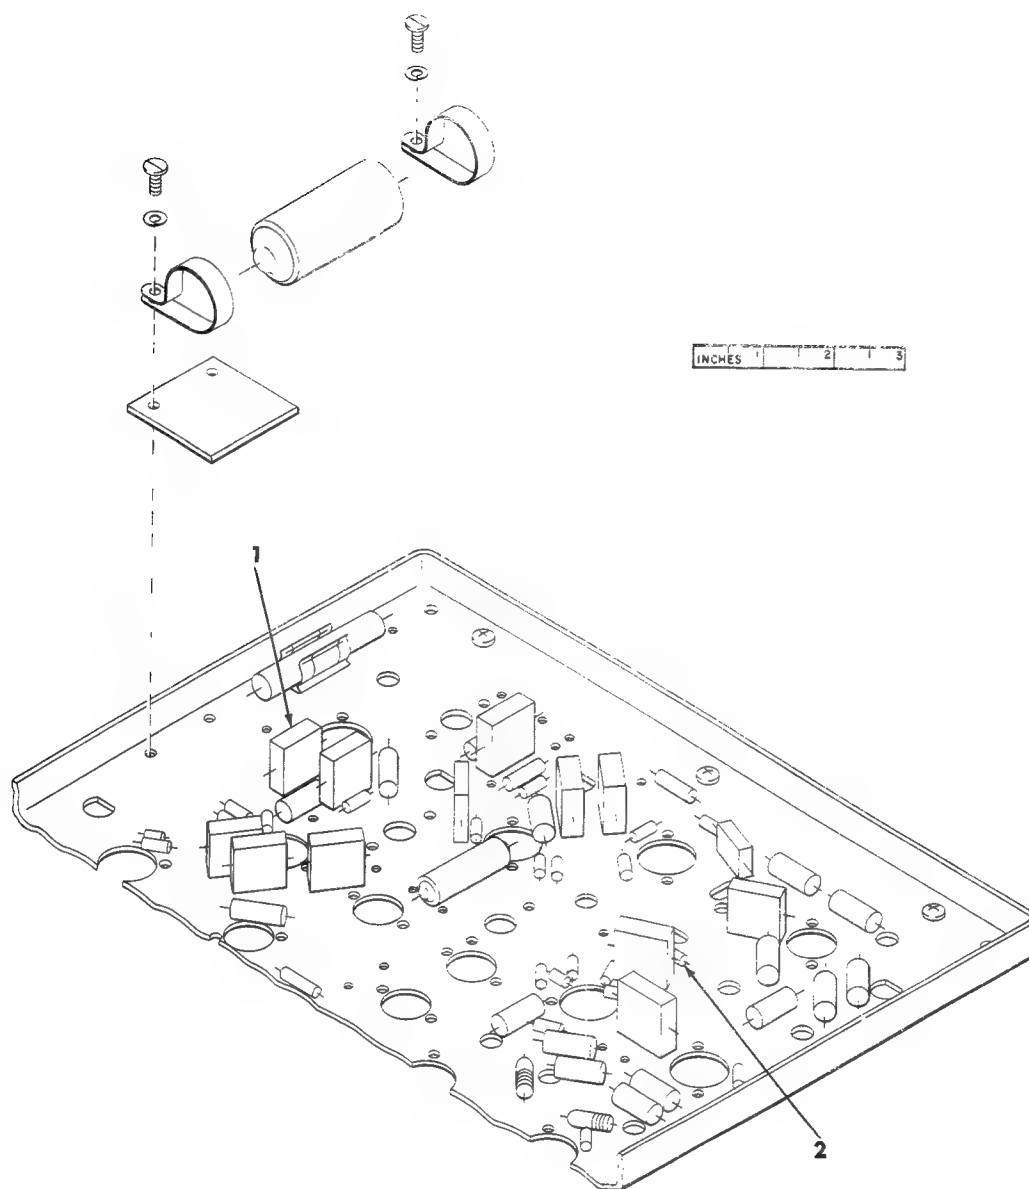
Generator assembly, pulse (9143996)—partial exploded view
